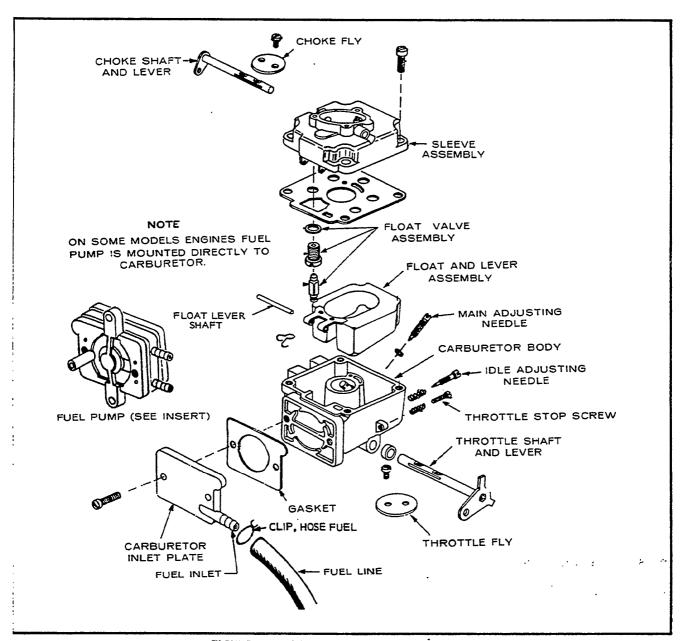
EXPLODED VIEW OF CARBURETOR
